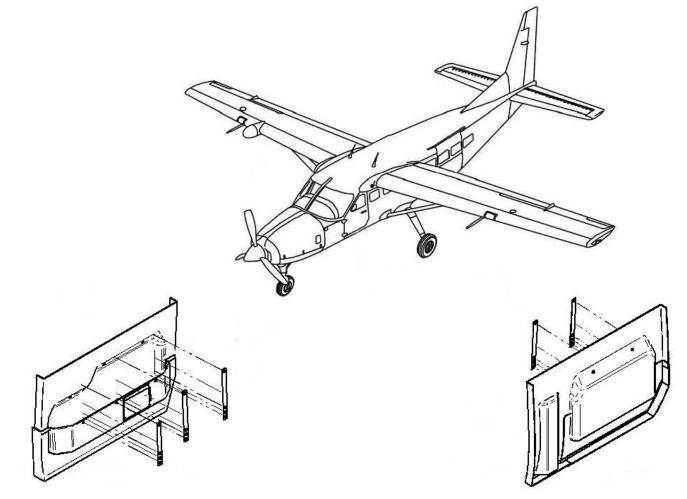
Cessna 208 / 208B Pilot and Co-Pilot Lower Interior Door Panel Installation
